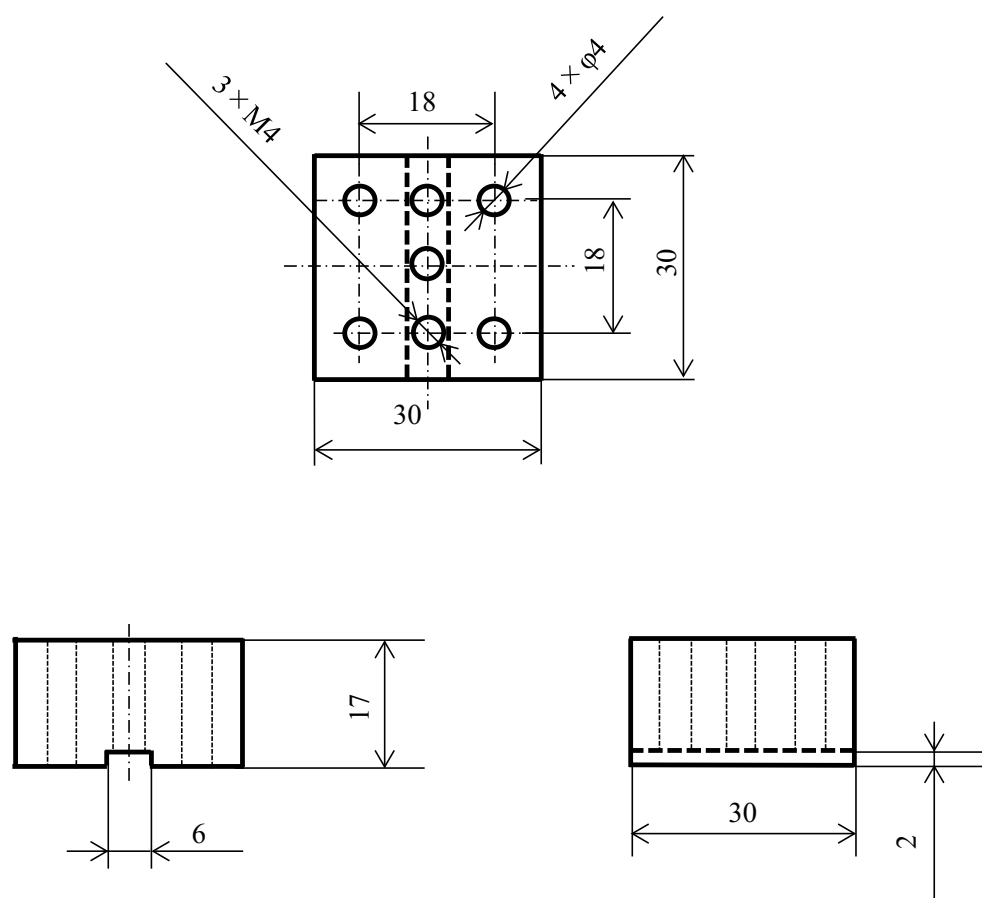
Schematic illustration of jig B for restricted side and upper part (Unit: mm).
